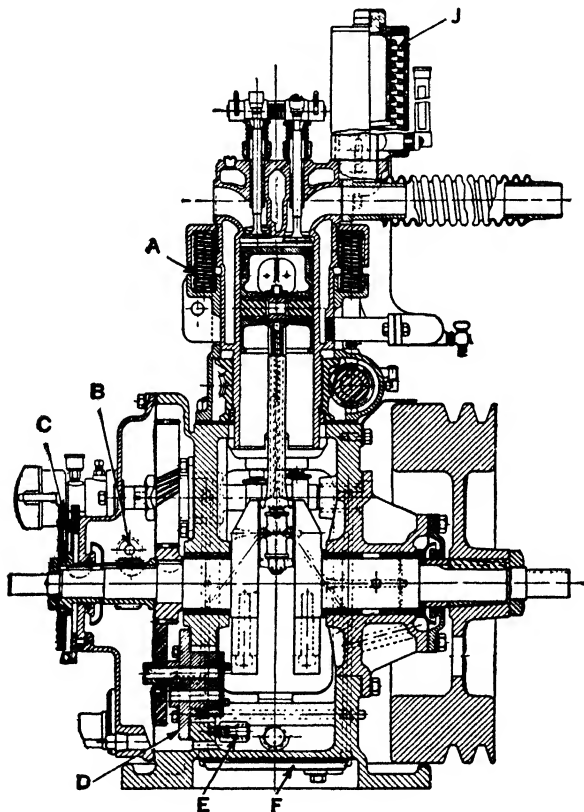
Sectional view of Waukesha ASTM-CFR fuel testing engine. A, cylinder back-lash springs; B, tachometer drive shaft and worm; C, spark position indicator; D, gear-type oil pump; E, oil pressure relief valve; F, lube oil heater; J, condenser cooling coil.
